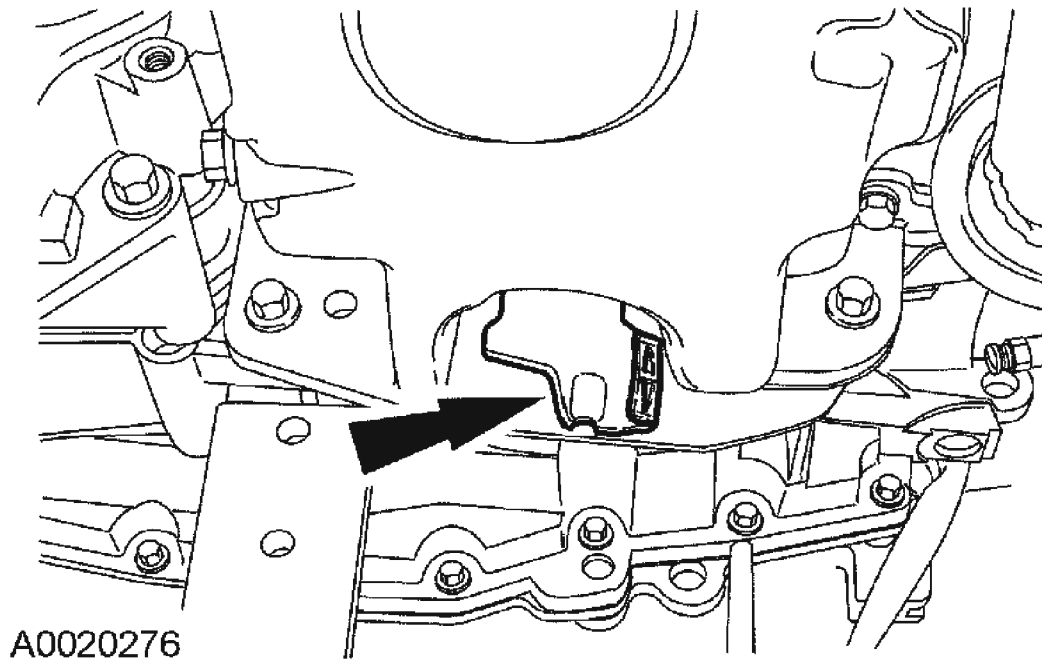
Removing Center Bolt From Rear Transaxle Mount
